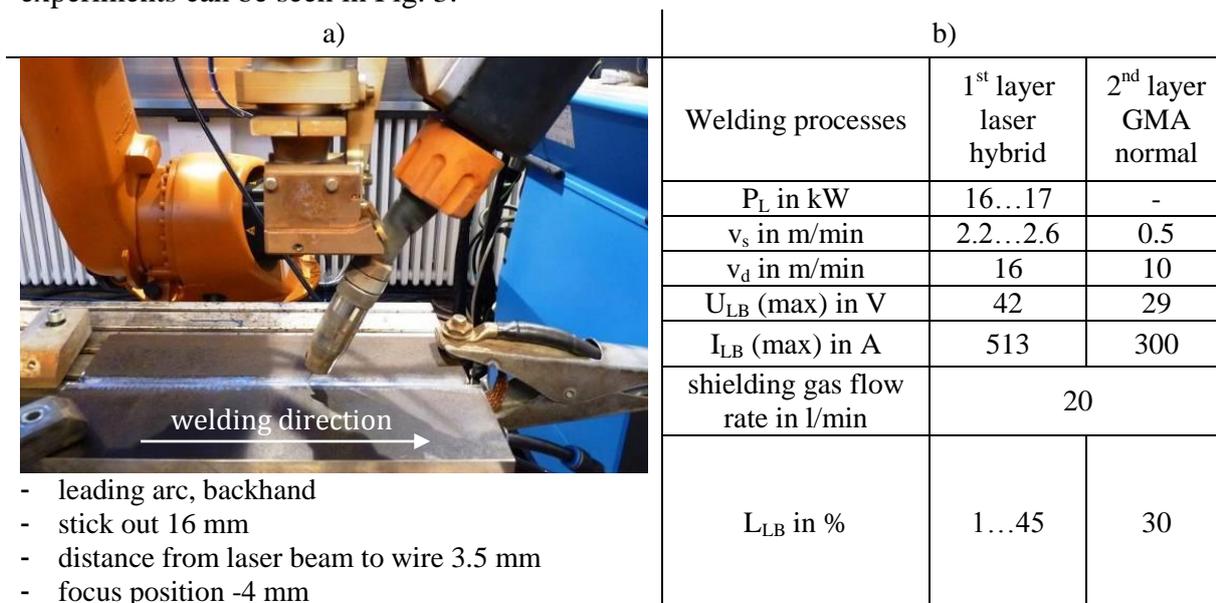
Experimental setup (a) and welding parameters (b)
